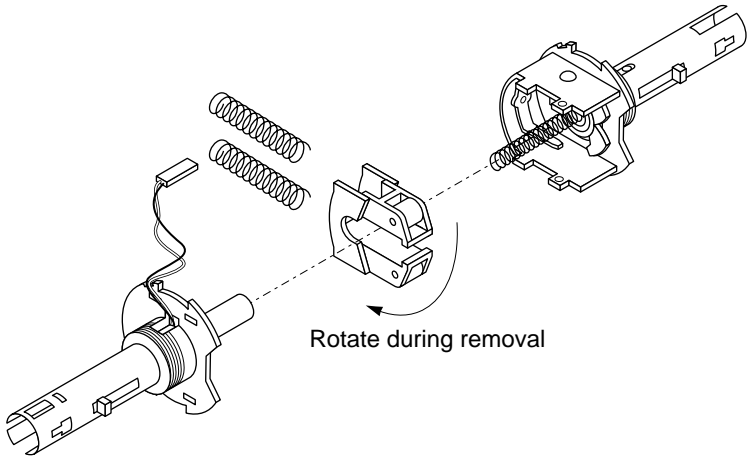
Separating Spindle Assemblies with Plug in Locked Position
